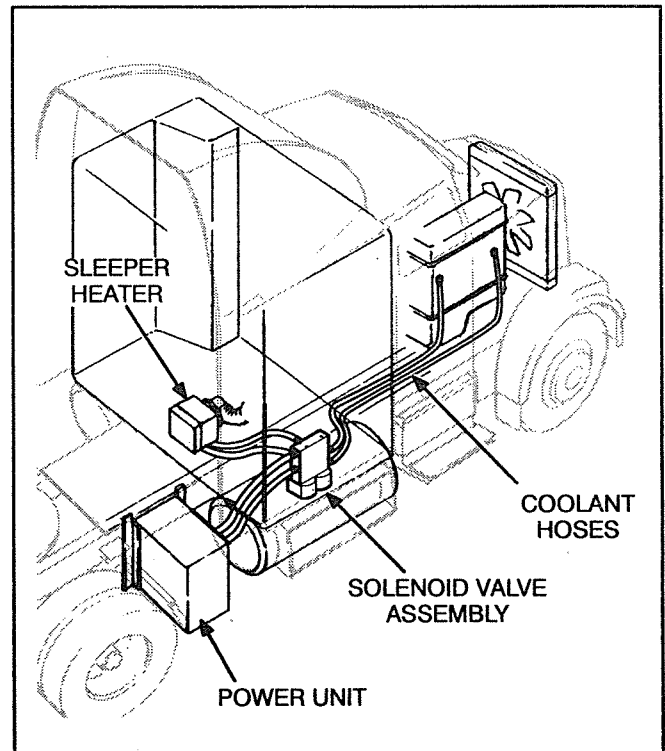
COOLANT SYSTEM COMPONENTS (STANDARD CAB CONFIGURATION SHOWN)
